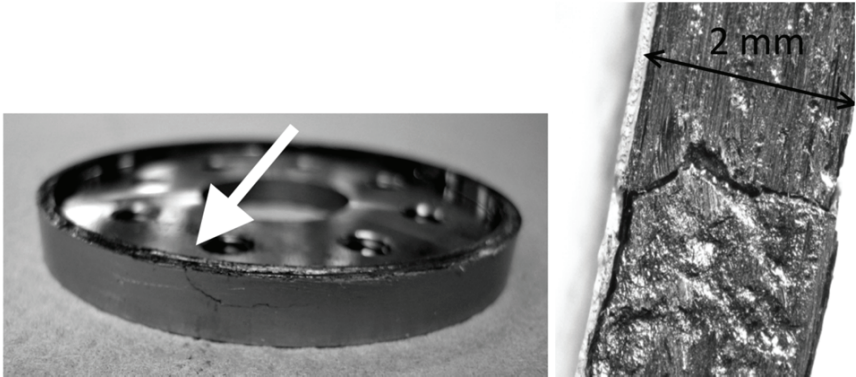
Crack in the HSS specimen after fretting fatigue failure. Photograph of the entire specimen and highly-magnified view of the fretting crack.
